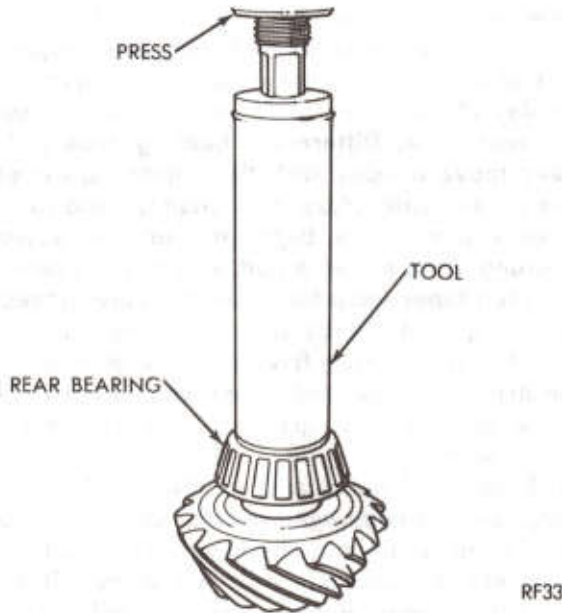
Installing Drive Pinion Rear Bearing Cone
